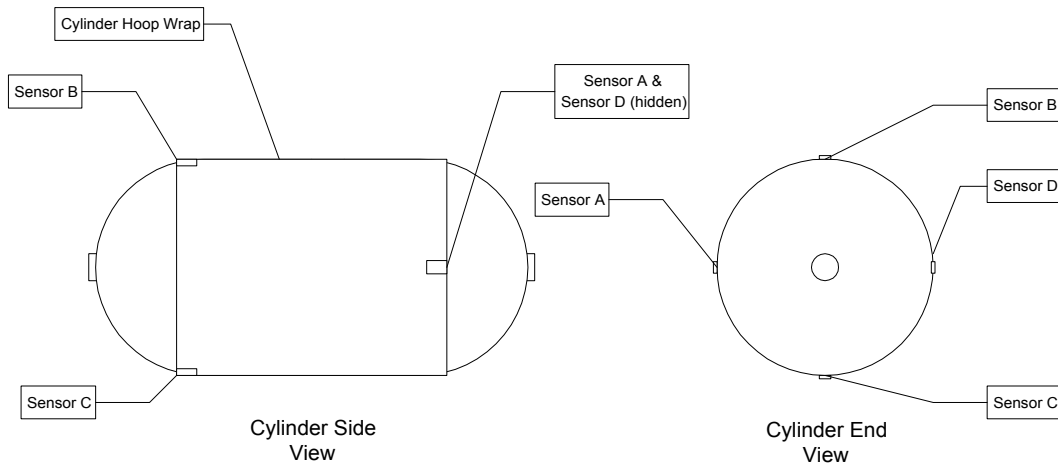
Embedded Sensor Final Design Manufacture
